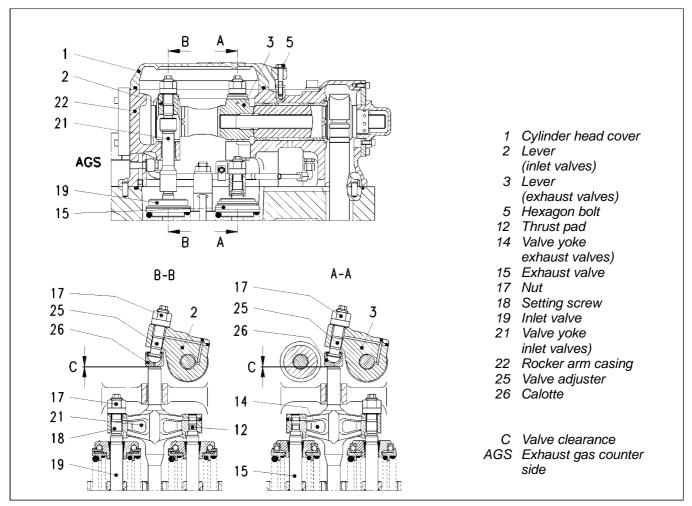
Rocker arm casing with rocker arm, measuring the valve clearance (inlet valve on the left, exhaust valve on the right)
